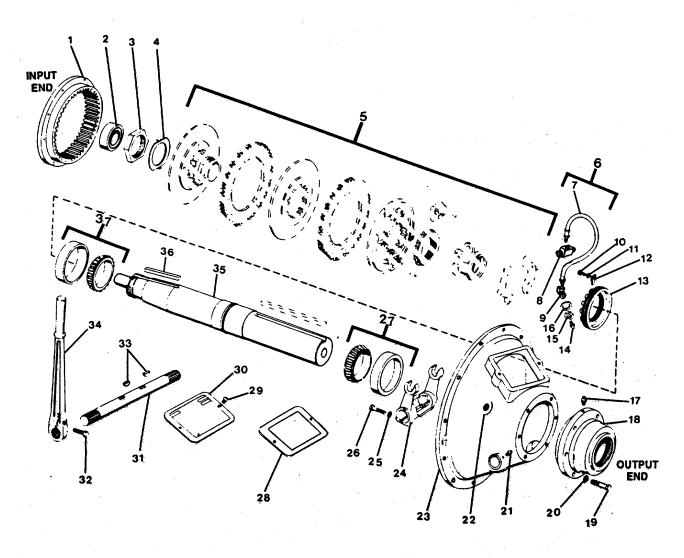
Friction Clutch Assembly Repair (Sheet 1 of 2).
